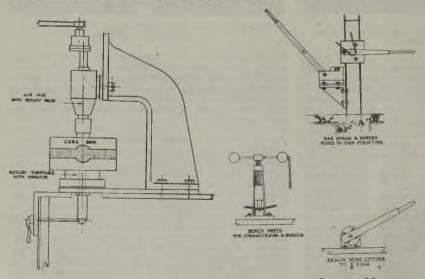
VICES AND VIBRATORS. FIG. 7.-BENDING AND CUTTING MACHINES.
